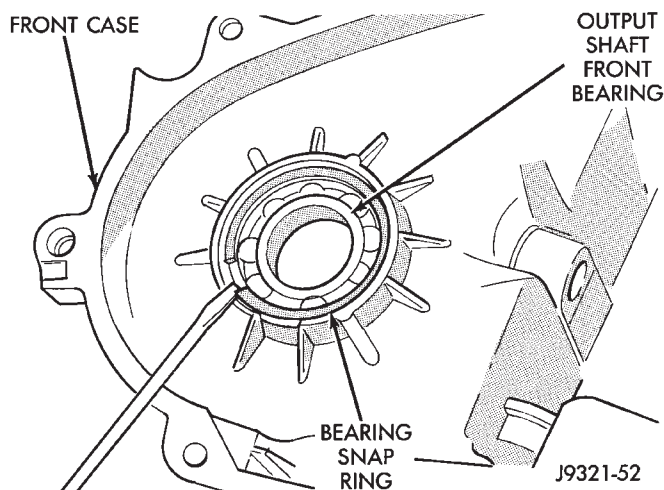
Output Shaft Front Bearing Snap Ring Removal
